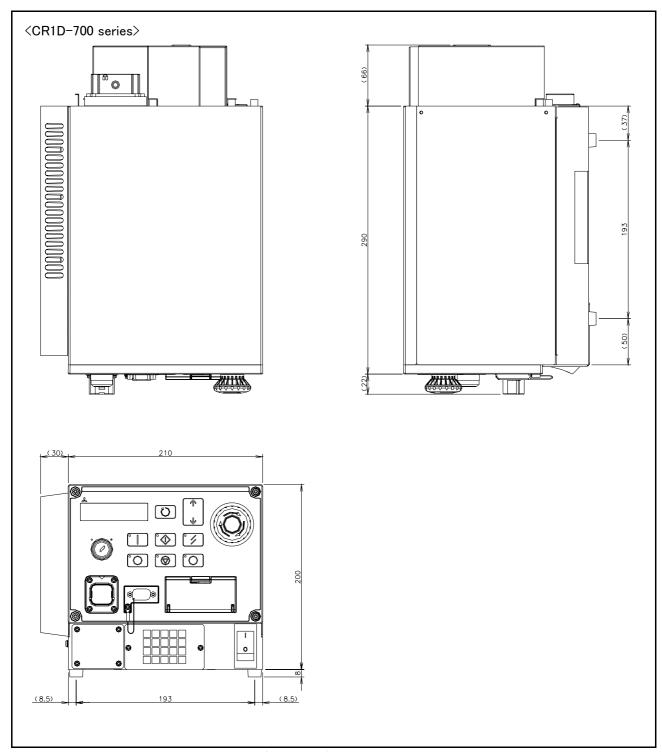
Outside dimensions of controller (CR1D-700)
